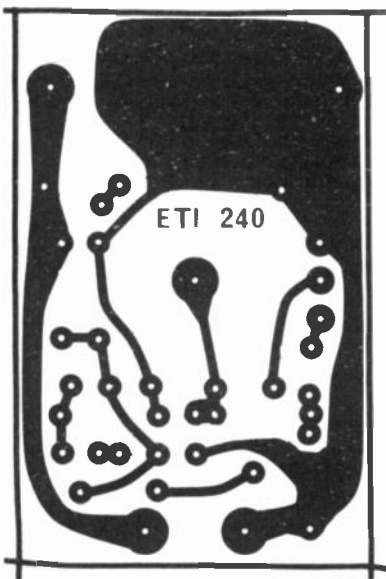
Printed-circuit layout for the flash. Full size 73 x 47 mm.
